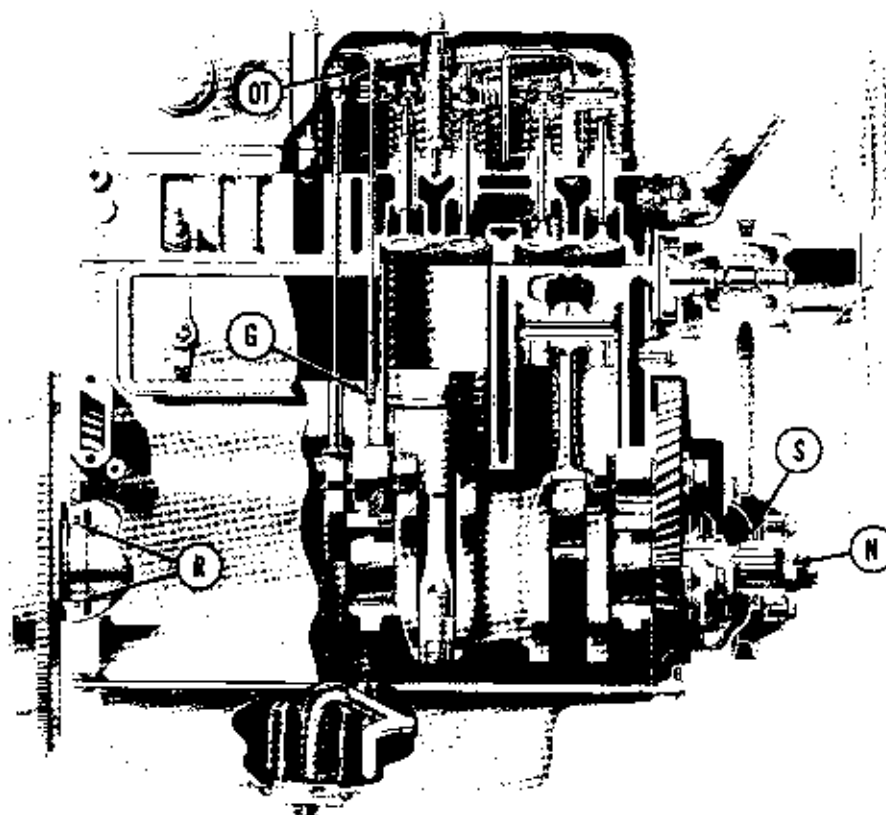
Section of NAA tractor engine showing oil tube grommet (G), front and rear oil seats (S) and (R). (N) is a ratchet nut.
